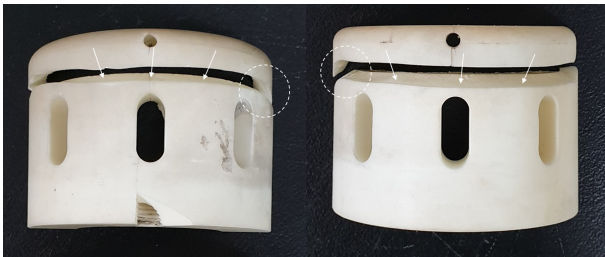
Location of failure for alumina specimen holder after thermal gradient test
